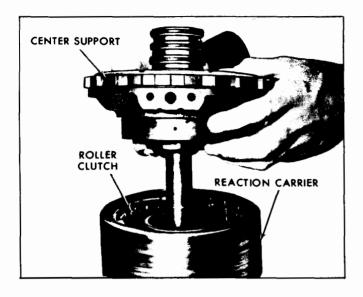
E-176 Installing Center Support Assembly parts involved were not removed on disassembly.
